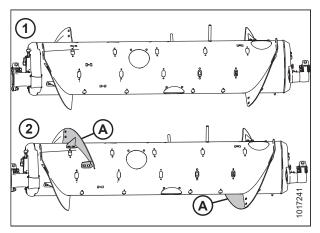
Auger Configurations – Rear View 1 - Wide Configuration 2 - Medium Configuration
